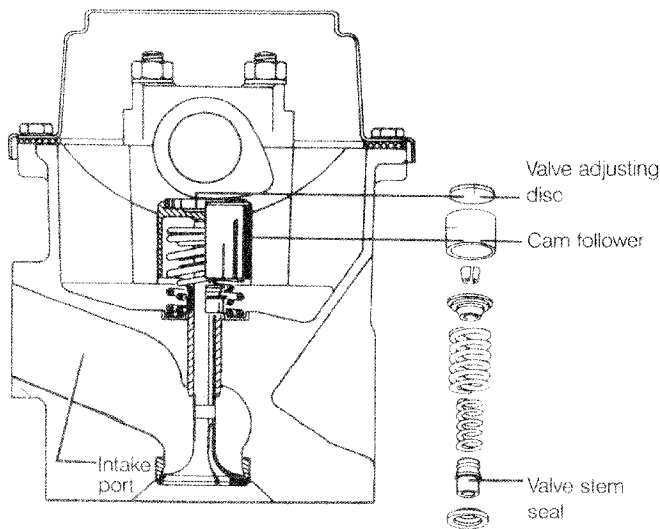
Cross-section of cylinder head showing cam lobe and cam follower. Adjusting disc fits in recess in follower.
